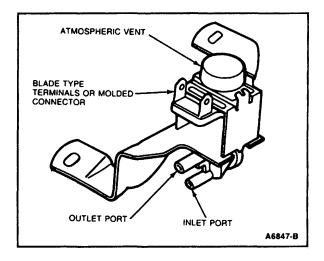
Typical Solenoid Valve Assembly — Normally Closed
